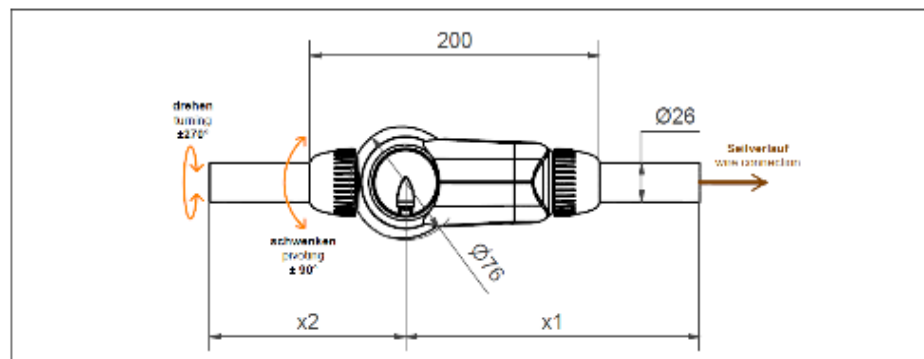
Dimensioned drawing - 2 axes joint RL-50-001
